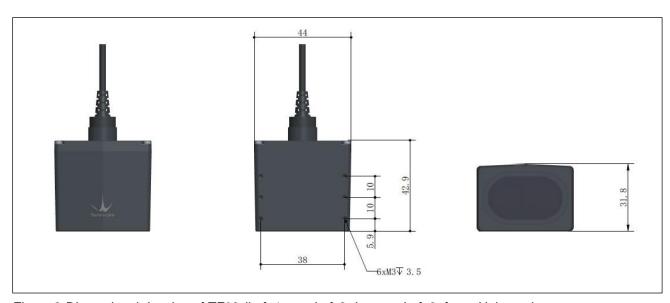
Dimensional drawing of TF03 (Left 1: top; Left 2: bottom; Left 3: front; Unit: mm)
